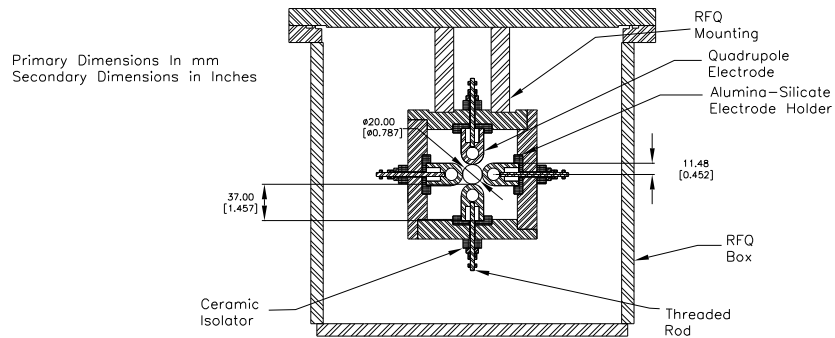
Mechanical drawing of the RFQ design (end view).
